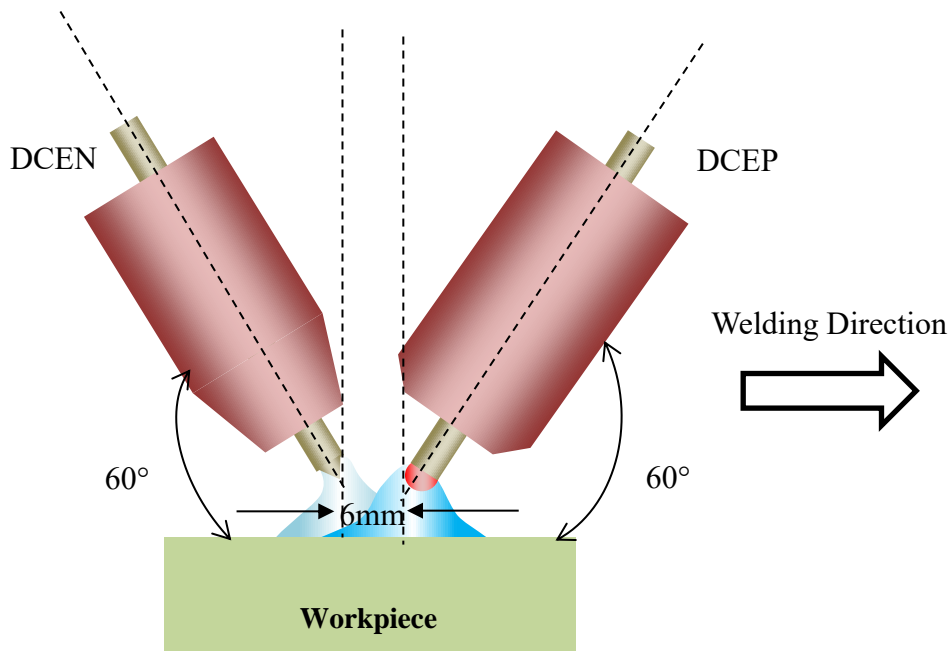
Schematic diagram of TIG/MIG hybrid welding torches
